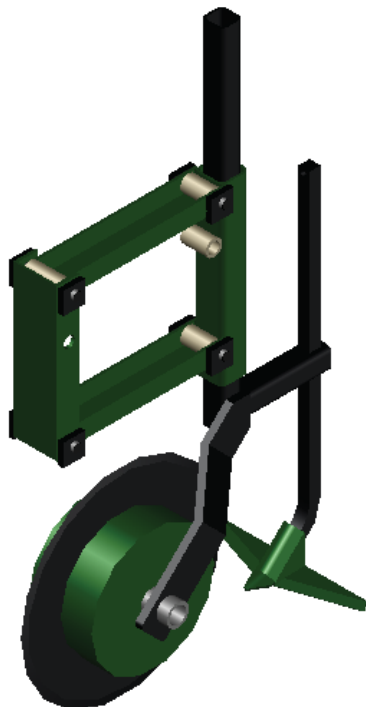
Parallelogram with single cutting disc and tyne and sweep assembly.
